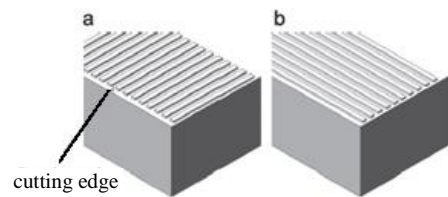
Schematic image of the two types of micro-texture on the tool rake face a) perpendicular to the cutting edge (90°) b) parallel to the cutting edge (0°)
